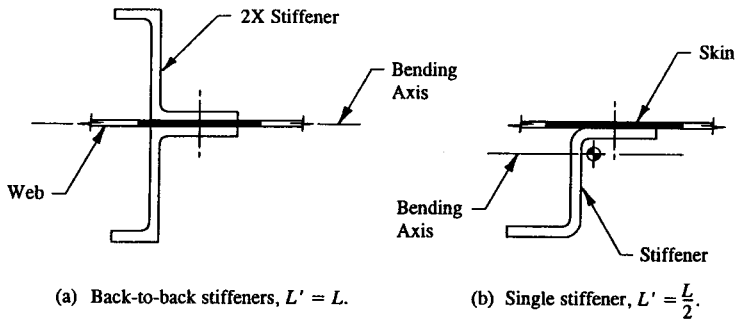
Column failure for stiffener-and-sheet combinations.
